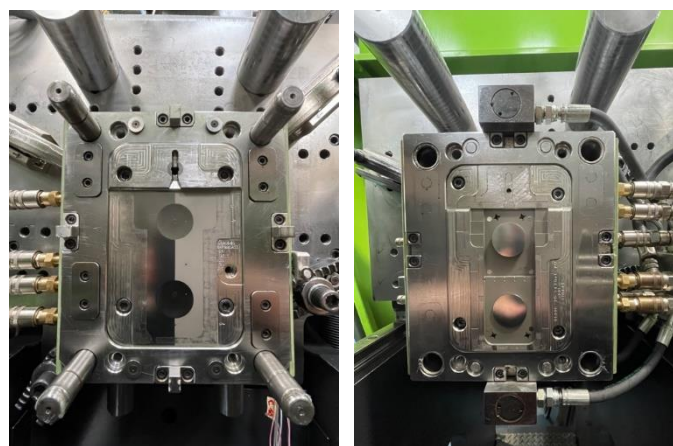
Industrial case study mould assembled into the injection machine.
